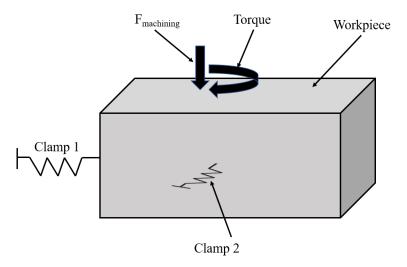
Model of Clamps (assumed elastic) attached with a workpiece
